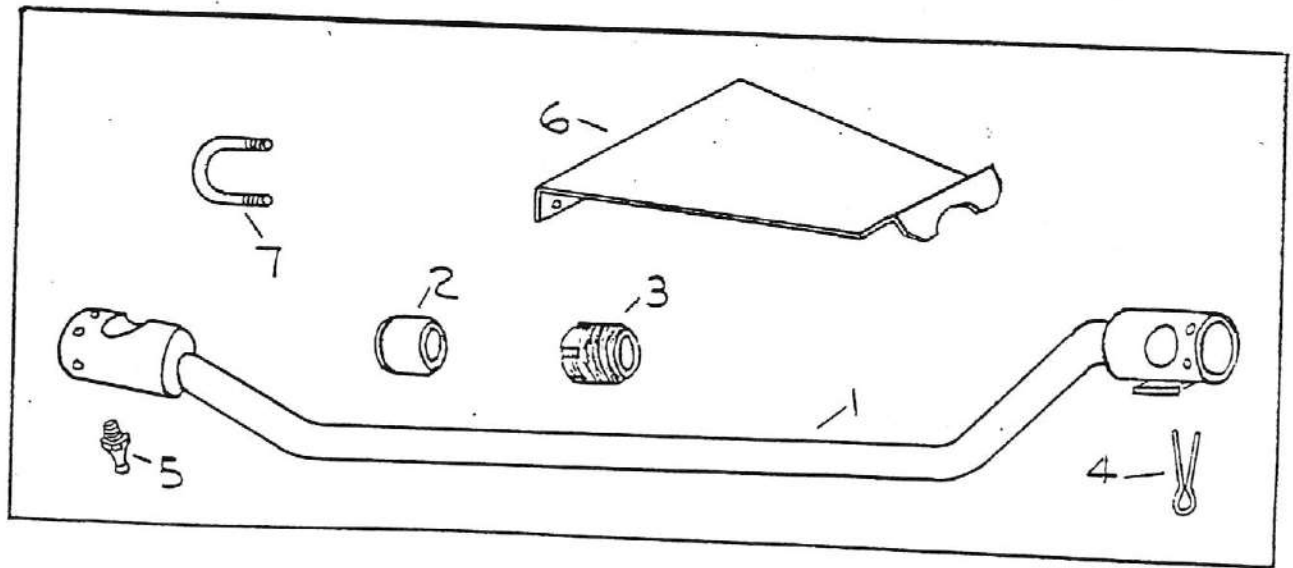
Steering — Draw Link & Mounting Bracket
